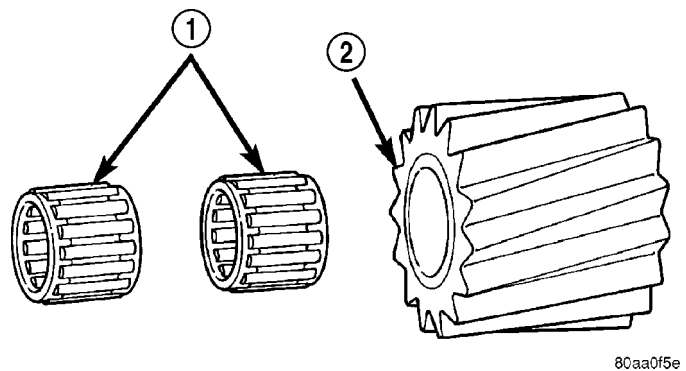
IDLER GEAR AND COUNTERSHAFT
